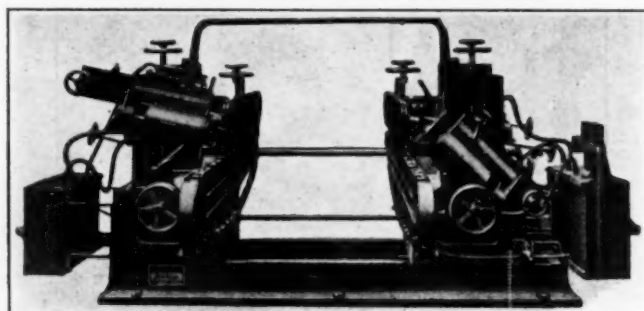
FRONT VIEW OF DOUBLE END BODY TENONER WITH HEAVY-TYPE TRAVELING PRESSURE BEAM, SHOWING SAW ARBORS TILTED 45 DEG. DOWN AND 15 DEG. UP
